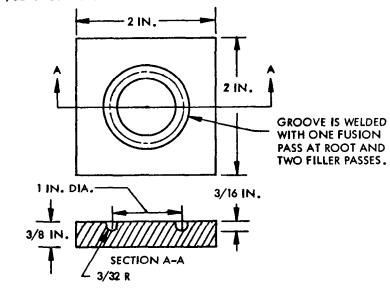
Sheet and Plate Weld Restraint Specimens
